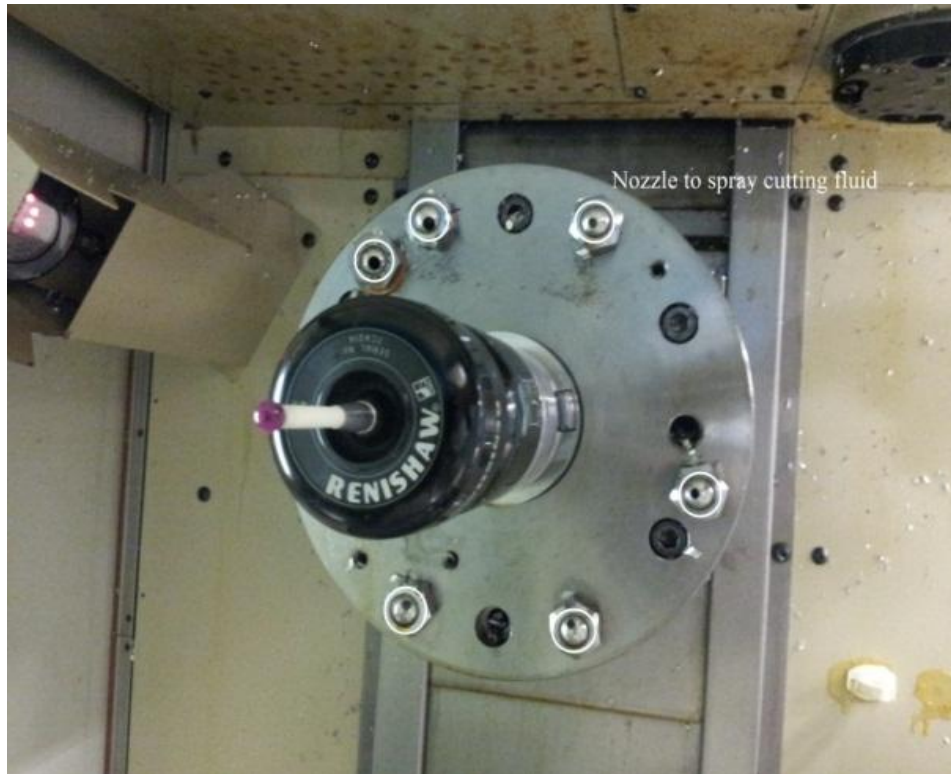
Spindle with nozzle to spray cutting fluid holding the probe
